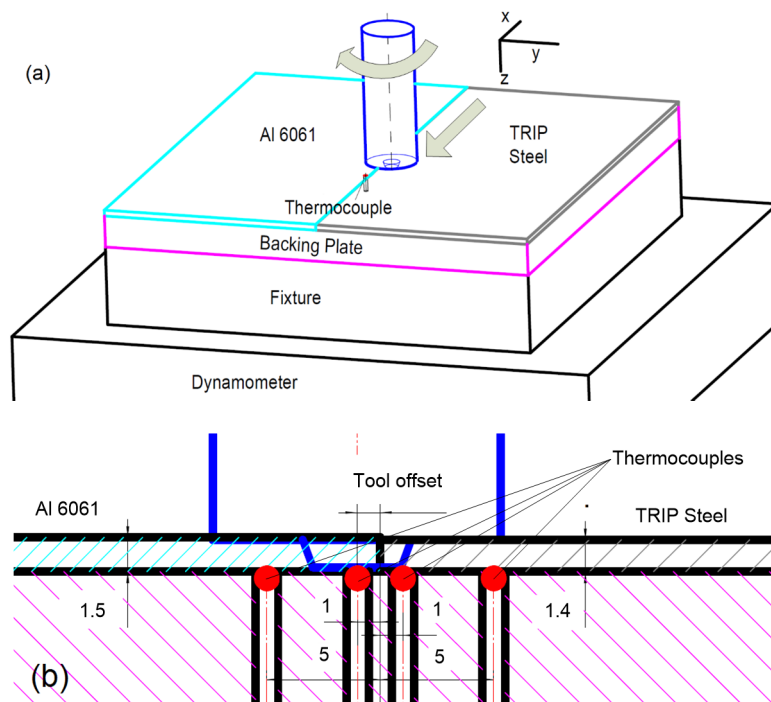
Schematic illustration of the FSW experimental configuration: (a) Overview; (b) Cross-sectional view perpendicular to the weld line (Unit: mm)
